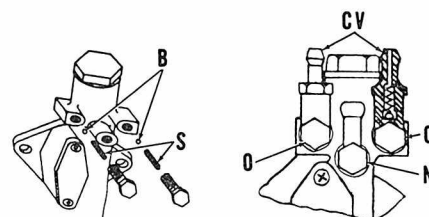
All pumps should be equipped with brass outlet check valve connectors (CV). Old style check valves (B & S) should be discarded. Inlet connector (N) must NOT have check valve.
